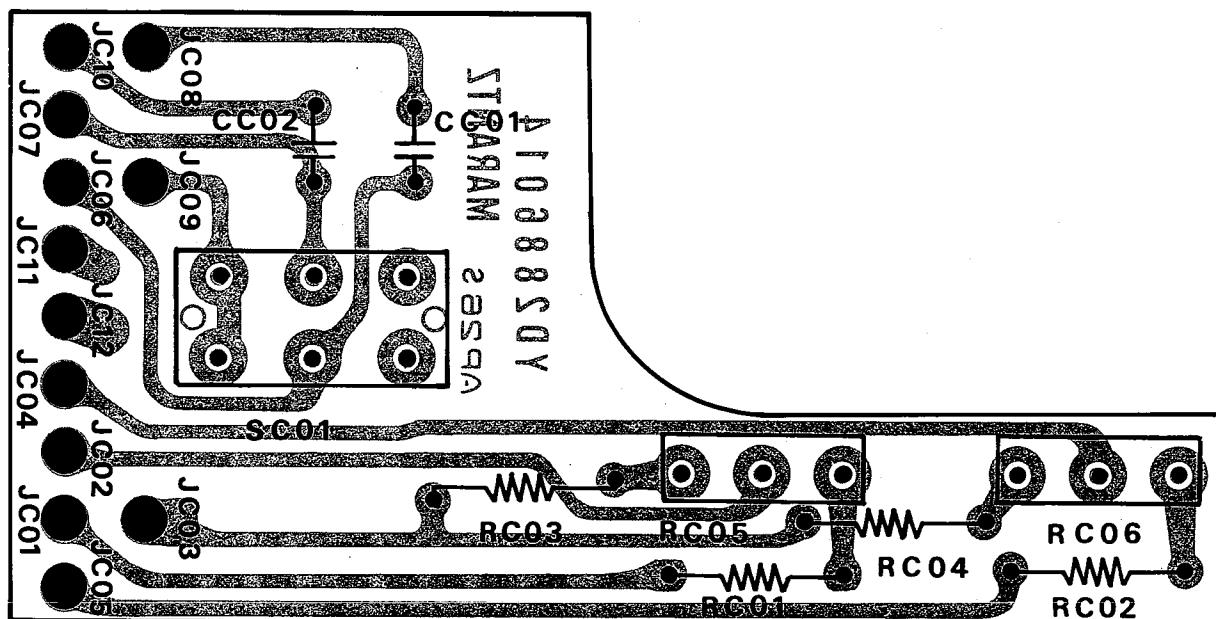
Dolby Unit Assembly P600 Component Locations
